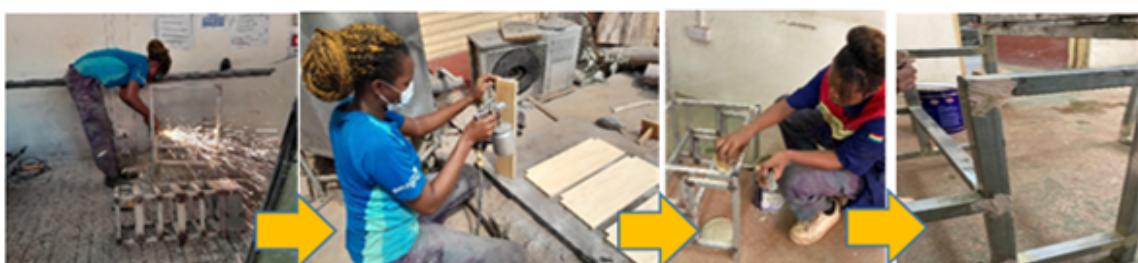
Workshop activities (Measuring → Cutting → Welding → Grinding → Assembling→ Finishing→ Testing (Source: Saah, 2025)
